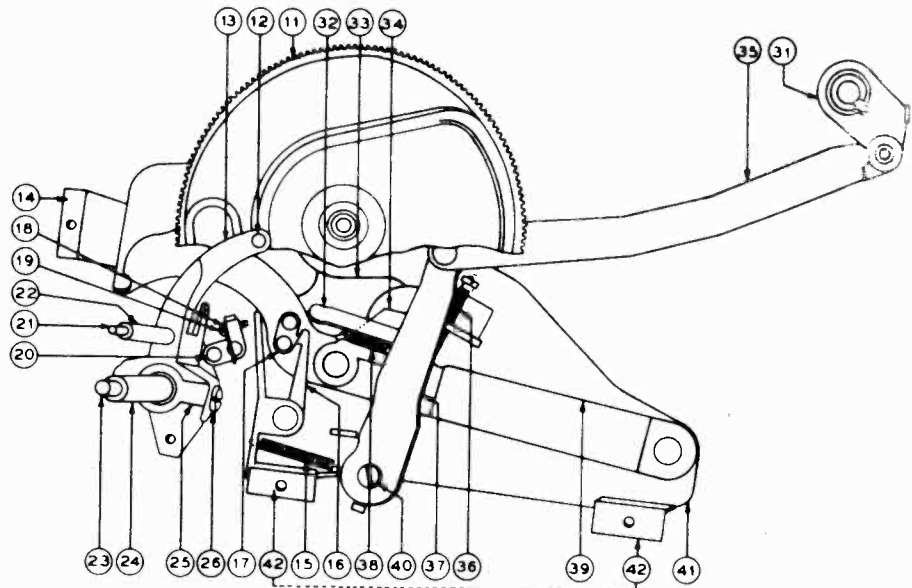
CUTAWY VIEW SHOWING PARTS UNDER SUB-PLATE ASSEMBLY (83) FIG. 3
